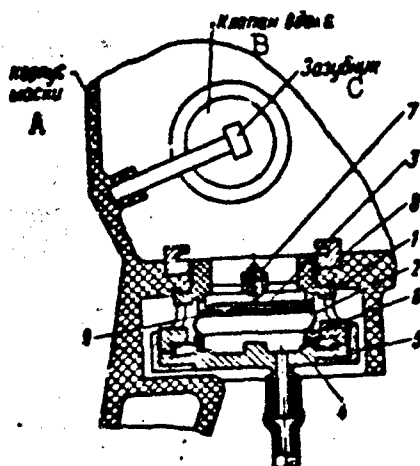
Mask expiration valve with excess pressure. 1) Expiration valve frame; 2) valve membrane; 3) iris valve; 4) cover plate; 5) connector nut; 6) annular shock absorber; 7) guide sleeve; 8) nut; 9) spring. A) Mask frame; B) inlet valve; C) bit.
